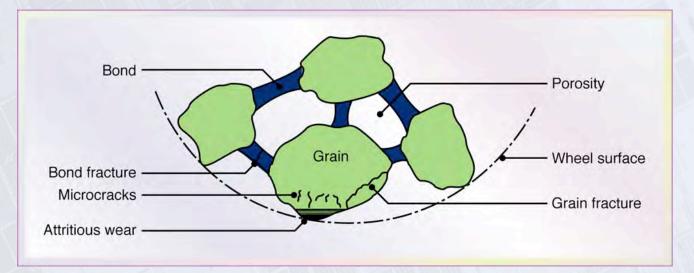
Schematic illustration of a physical model of a grinding wheel showing its structure and wear and fracture patterns.
